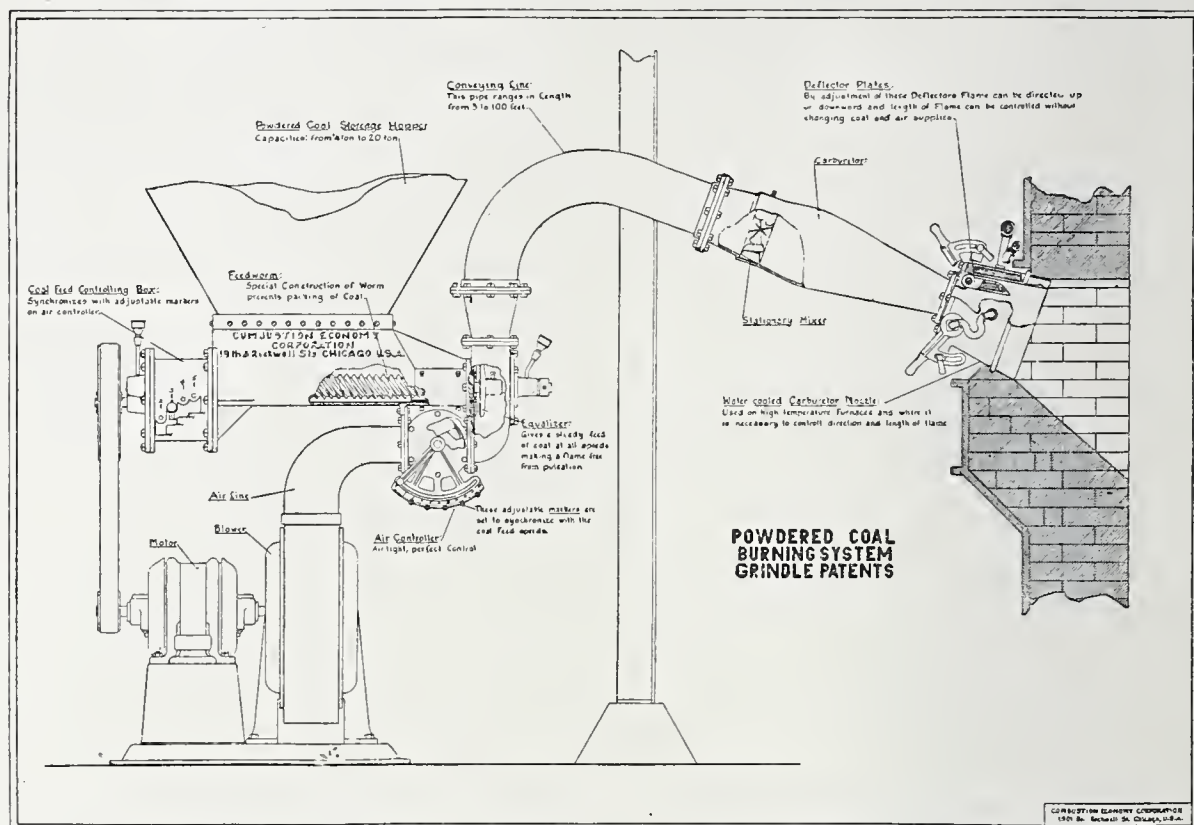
Grindle Small Consumer's Unit as applied to a Melting Furnace (*The Grindle Fuel Equipment Co.*)
